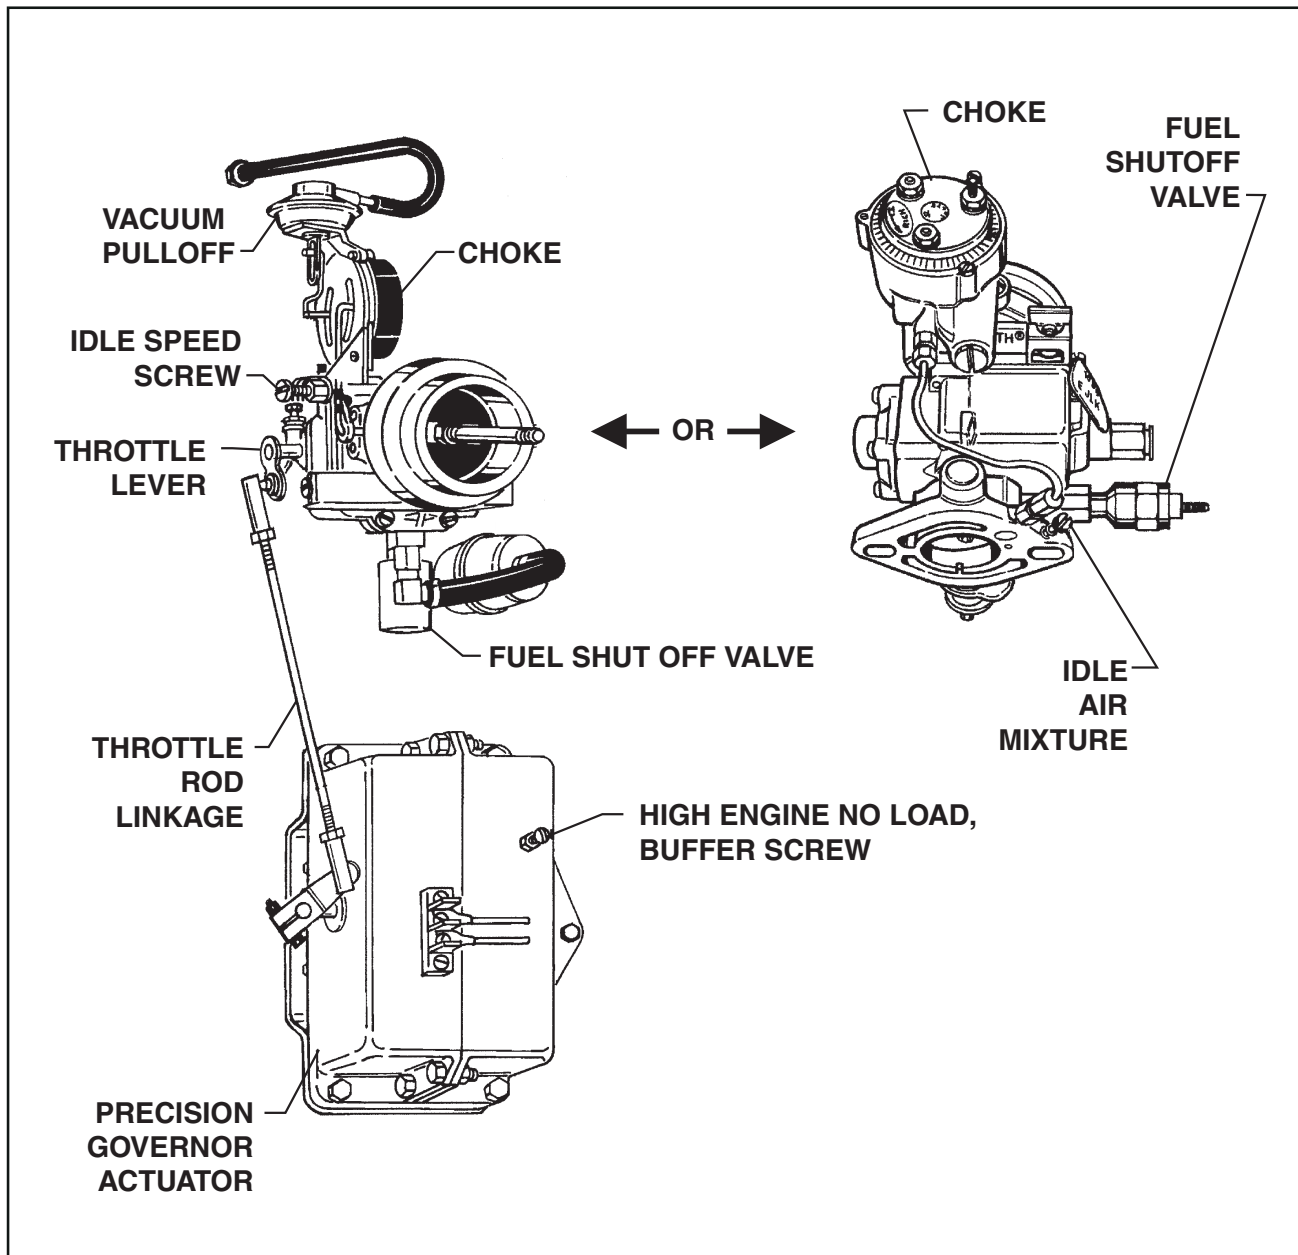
Precision Governor Adjustment - Ford Engine (Sheet 1 of 2)
